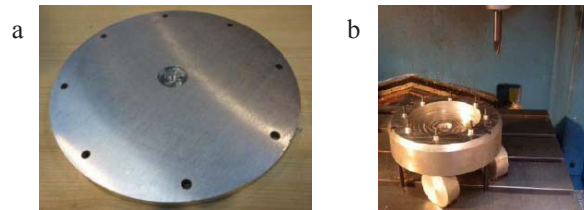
(a) Workpiece used in the study; (b) Workpiece tied to the table of the machining center.
